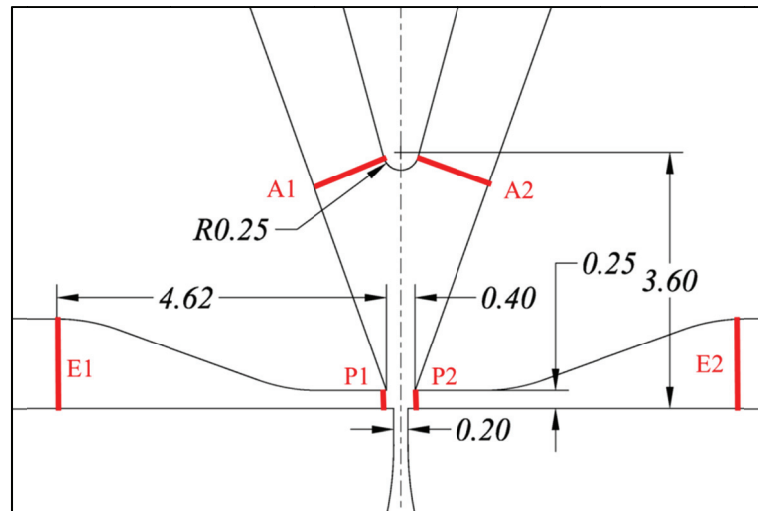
Detailed dimensions of the switching zone of the designed oscillator prototypes, (in mm)
